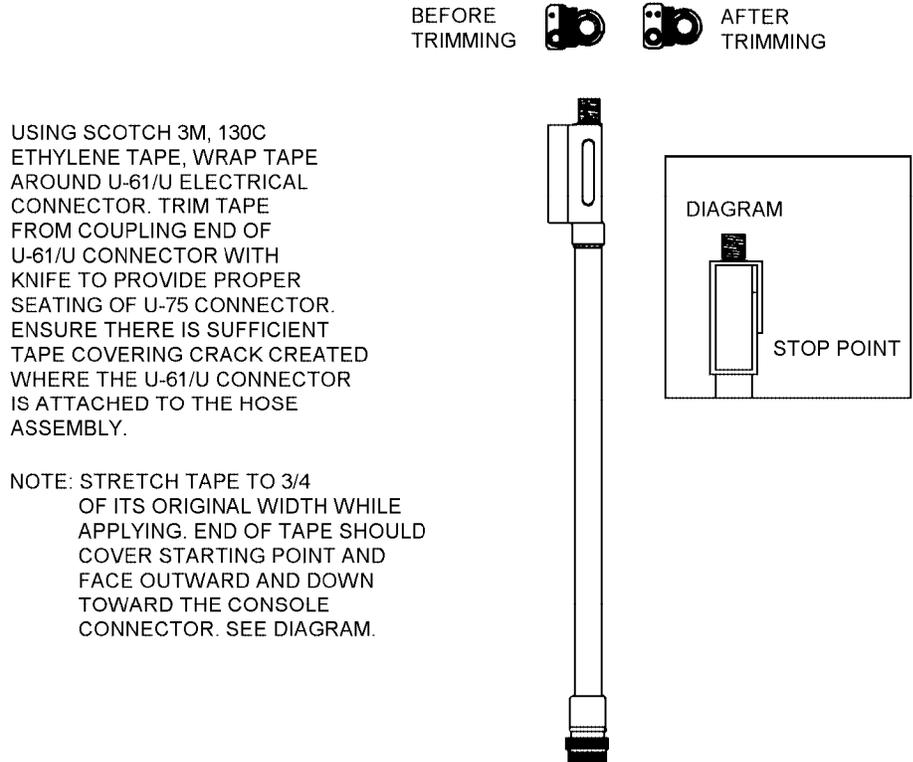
Modified Regulator to Seat Kit Hose Assembly Taping
